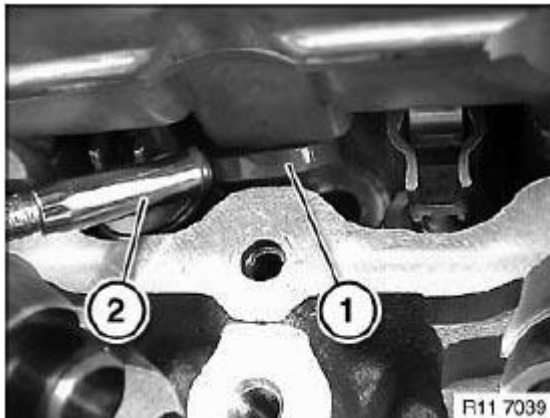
Removing Cylinder Head Bolt Washer Using Magnet
